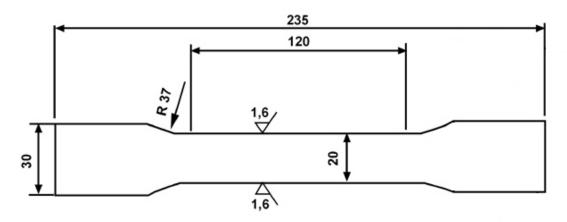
The tension test piece geometry for materials with thickness less than 3mm.
